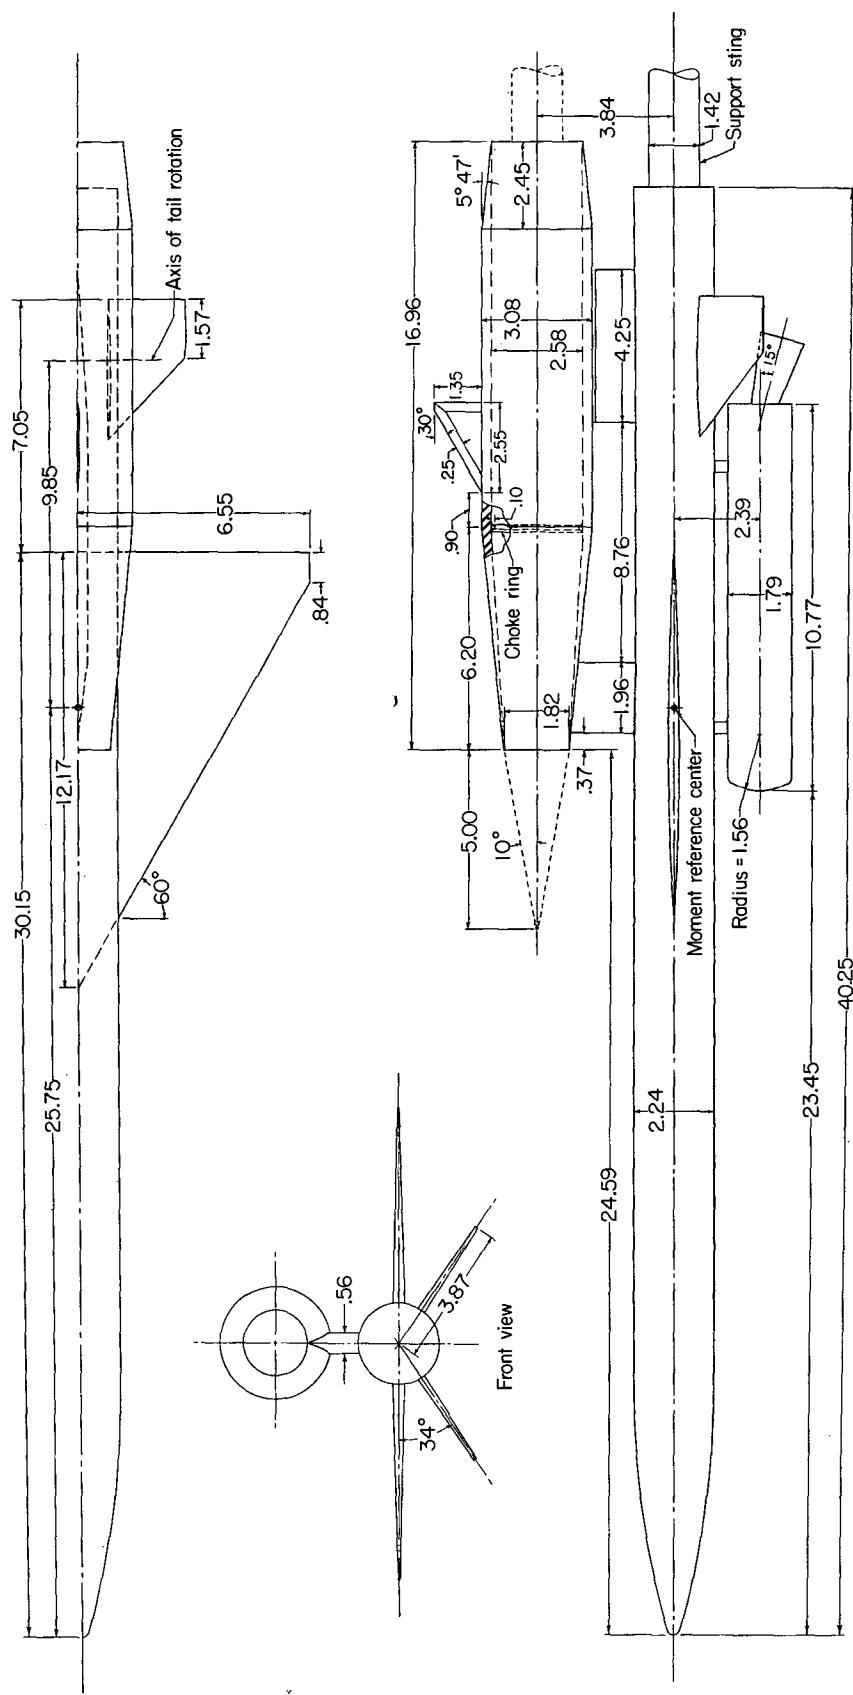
Three-view drawing of model. All linear dimensions are in inches.
